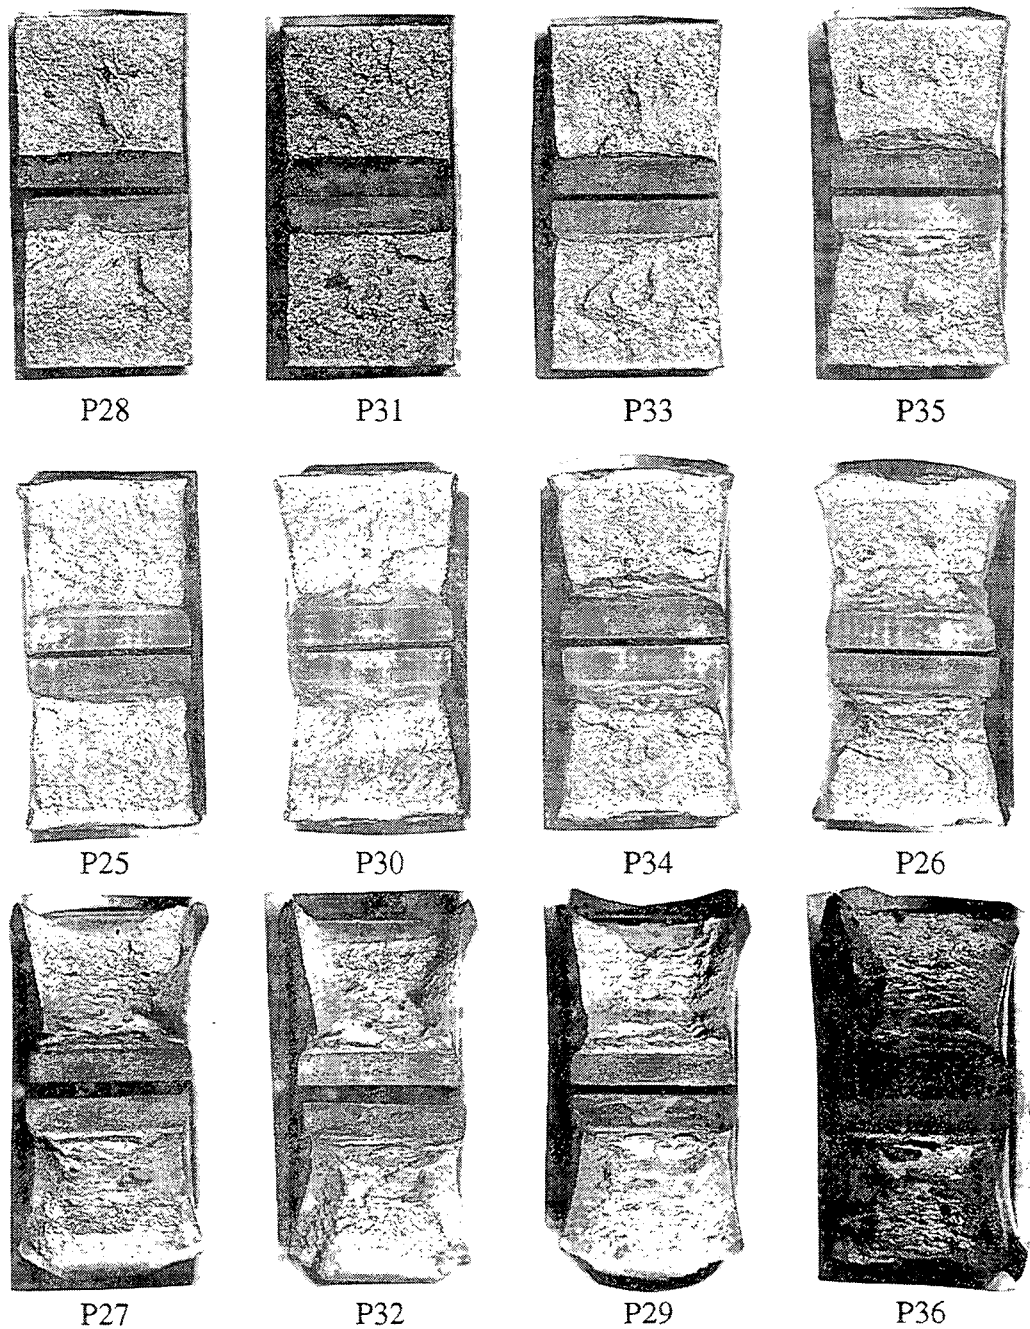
Charpy Impact Specimen Fracture Surfaces for Kewaunee Reactor Vessel Intermediate Shell Forging 122X208VA1 (Tangential Orientation)
